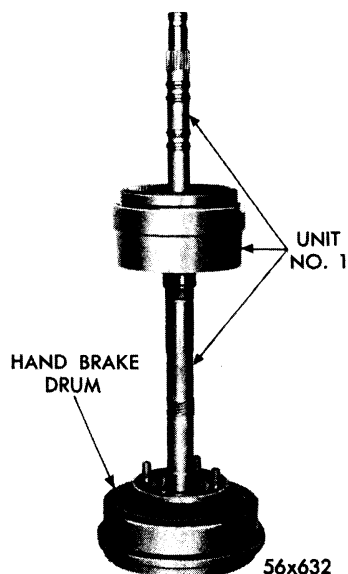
Using Propeller Shaft Flange and Brake Drum Assembly (As a Holding Fixture for Unit No. 1)
